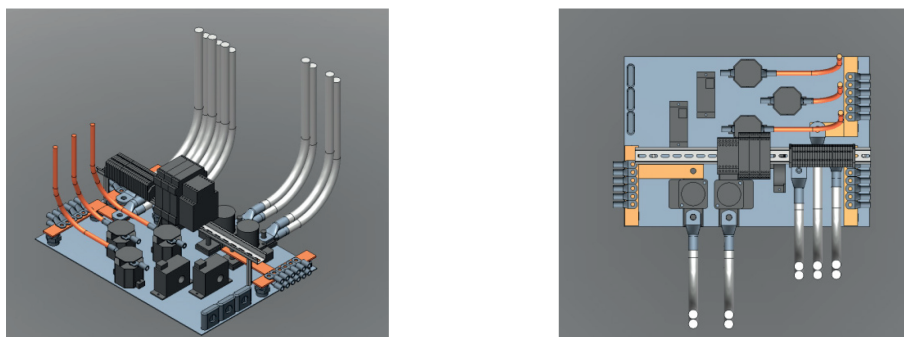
Perspective view (left) and top view (right) of the interconnection board drawing
